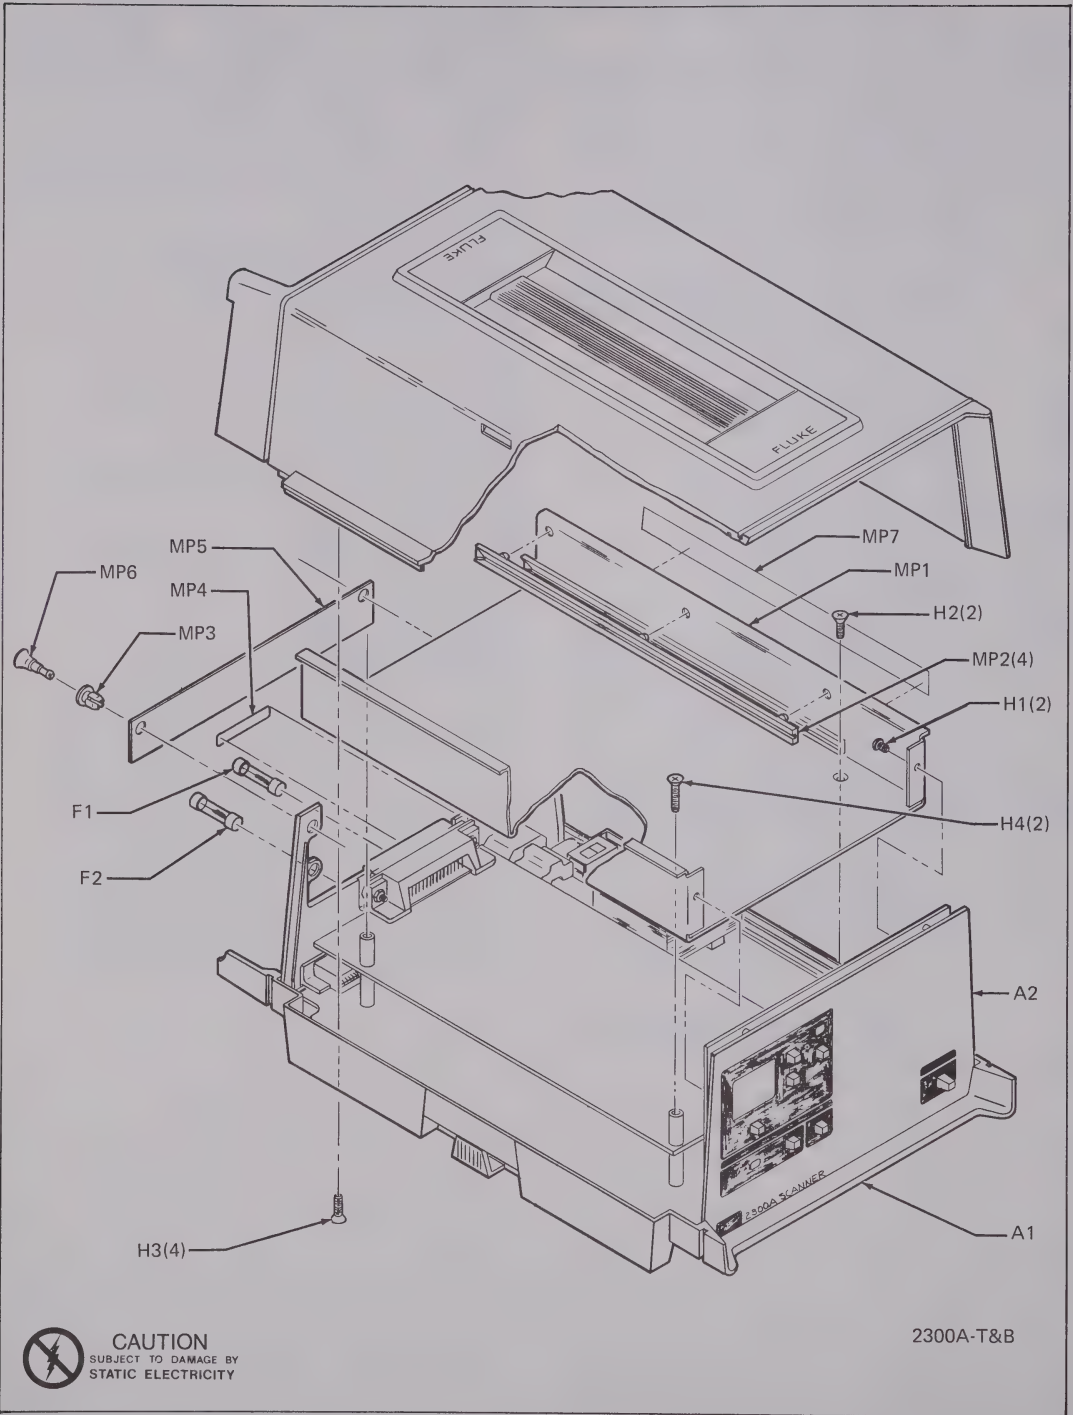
Final Assembly, 2300A Scanner Mainframe
